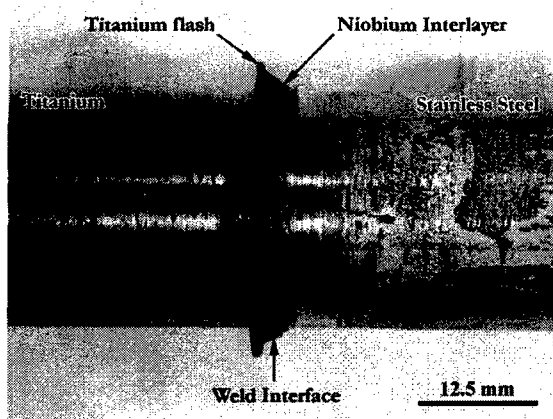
Photograph of as-welded Ti/Nb/SS joint.
